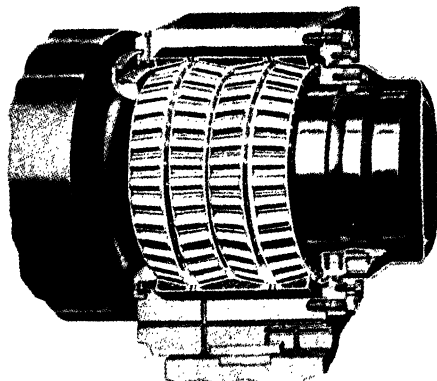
Four-row Tapered Roller Bearing Roll Neck Mounting.
